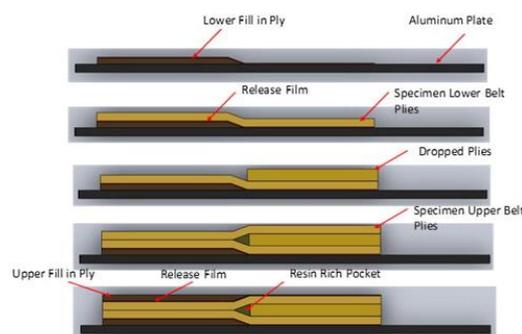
Ply fill-in technique for manufacturing of the tapered panel.
